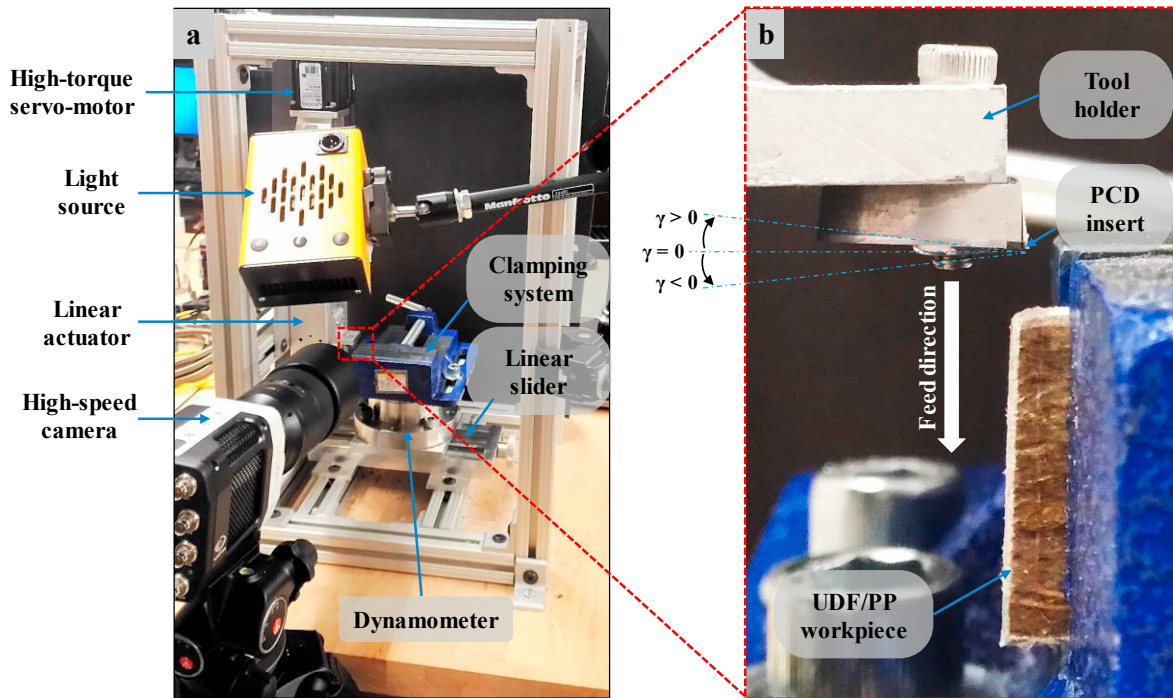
(a) Photograph of the whole experimental setup. (b) Photograph showing the PCD insert position against the workpiece.
